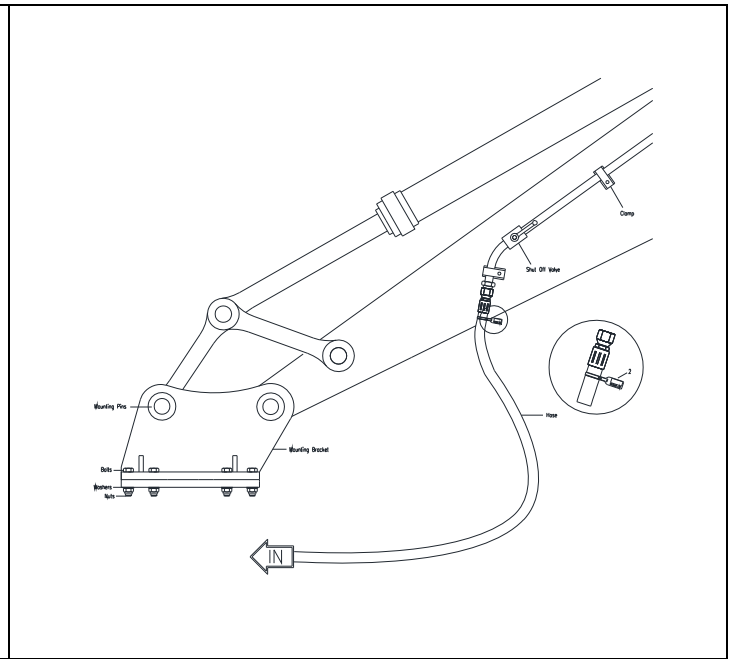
Hydraulic Connections To Carrier - Typical
